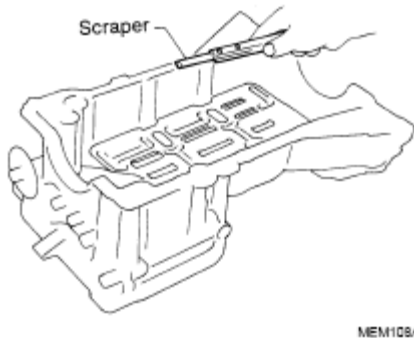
Identifying Oil Liquid Gasket From Bolt Holes And Threads
